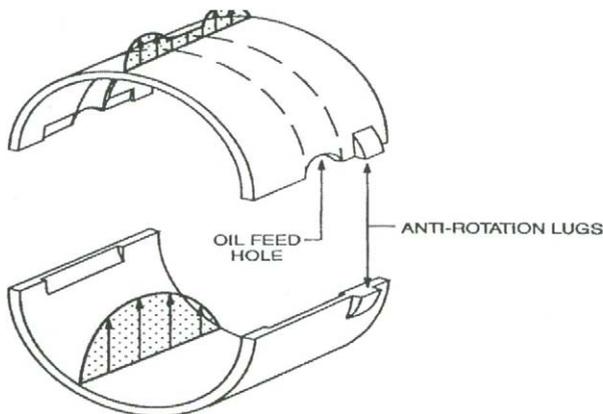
Straight sleeve bearing liner (Courtesy of Elliott Co.)
